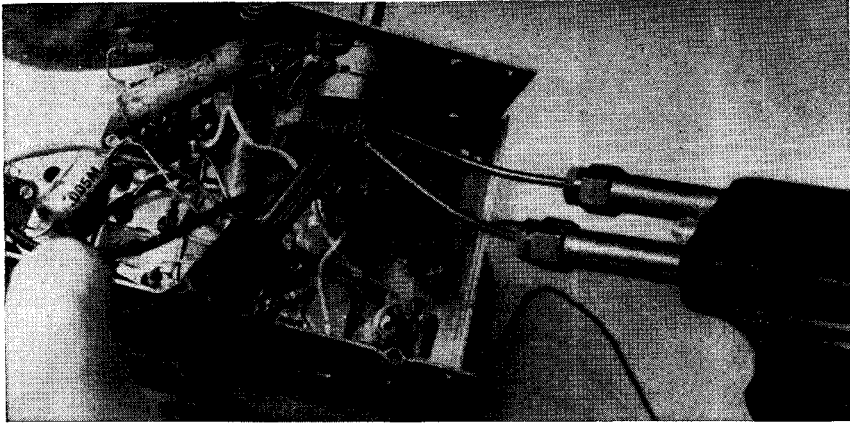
Using older model of Weller soldering gun for unsoldering one of the connections to an on-off switch that is mounted on the back of the volume control in an a-c/d-c radio set
